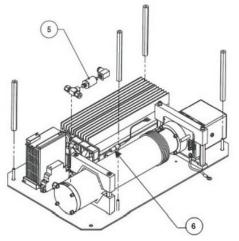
8/28 m sample cell panel assembly parts (continued)
